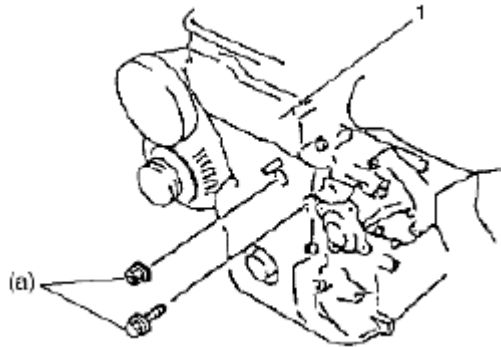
Identifying Timing Chain Cover Bolts & Nut
